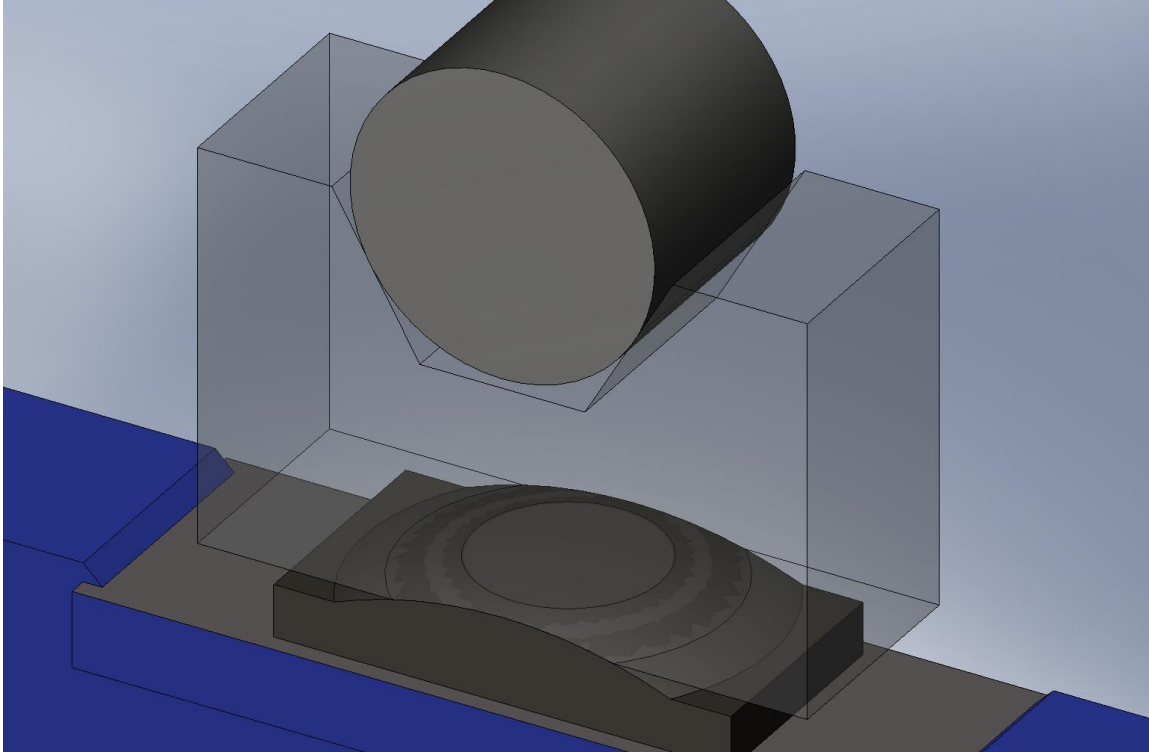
Transparent view of Clamp Mounting Base, coupling the Support Tube to the Crossbeam (via the Spherical Bearing).
